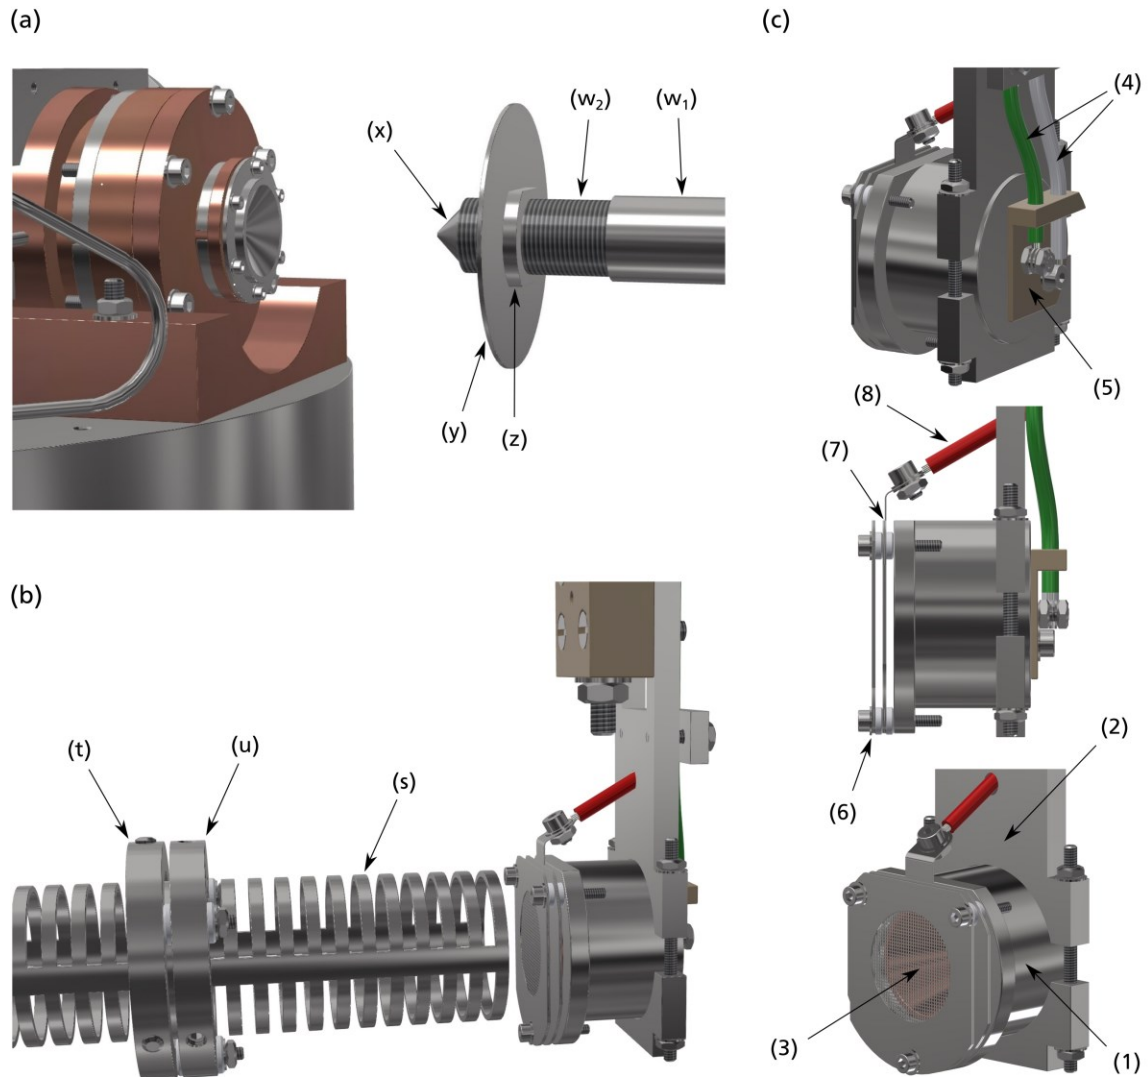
Detailed View of Front and Back Side of the Beam Section and of the Faraday Cup
